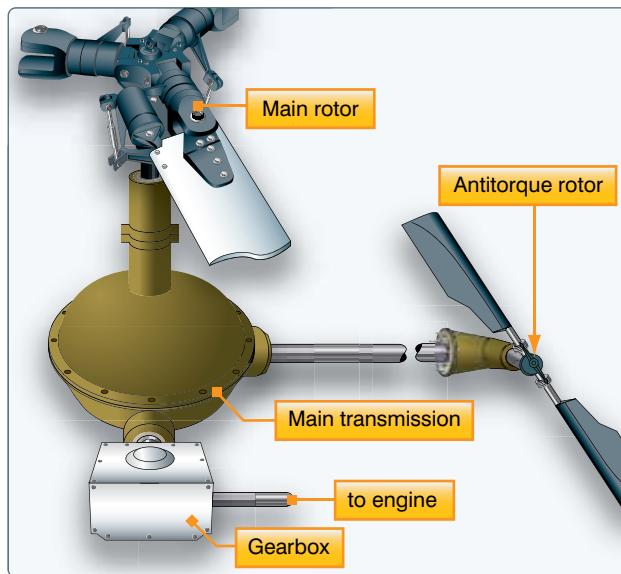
The main rotor transmission and gearbox reduce engine output rpm to optimum rotor rpm and change the axis of rotation of the engine output shaft to the vertical axis for the rotor shaft.
